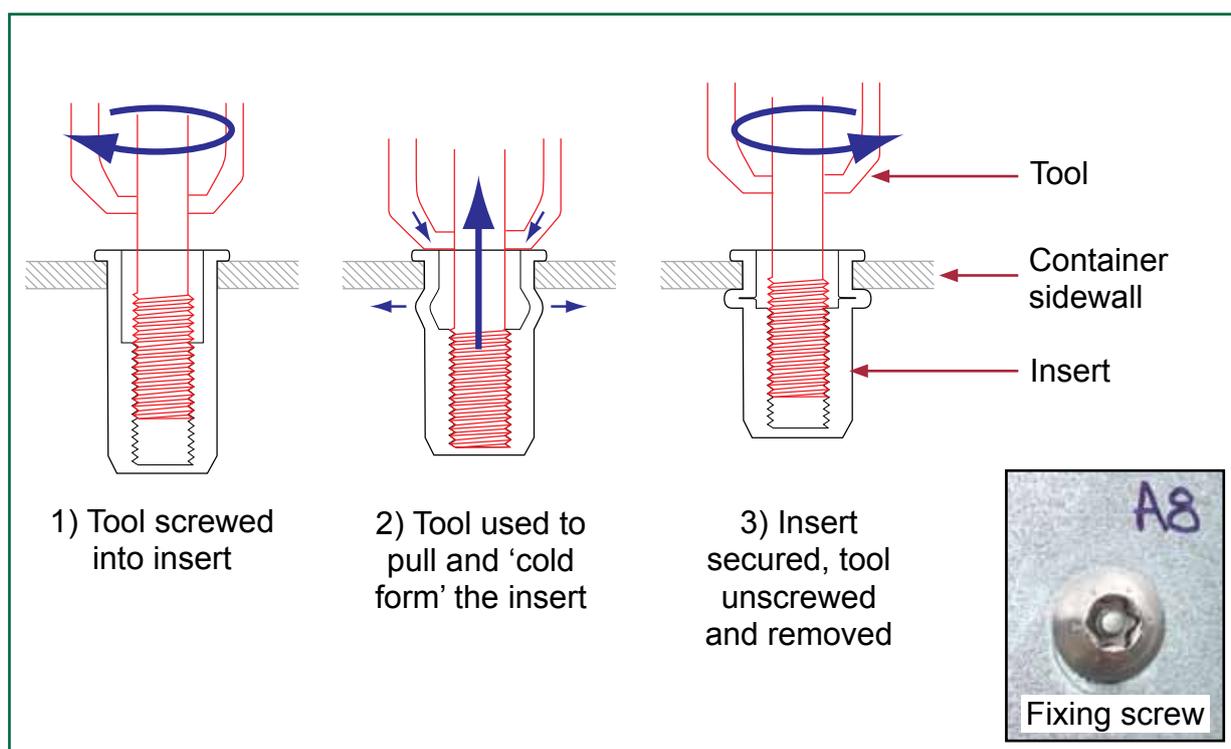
Threaded insert and fixing screw used to secure the transit plate
